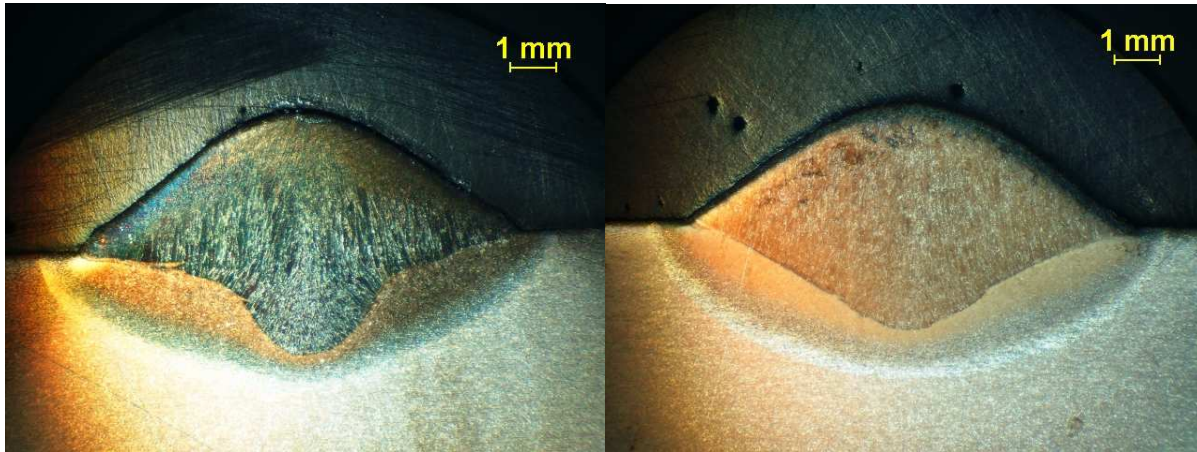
Macrostructure of weld using gas 18% CO₂ + 82% Argon; left Pulsed transfer, right Dip transfer.
